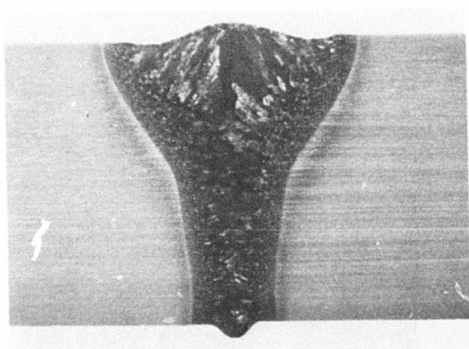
WELD CROSS SECTIONS (TITANIUM ALLOY) TEST
